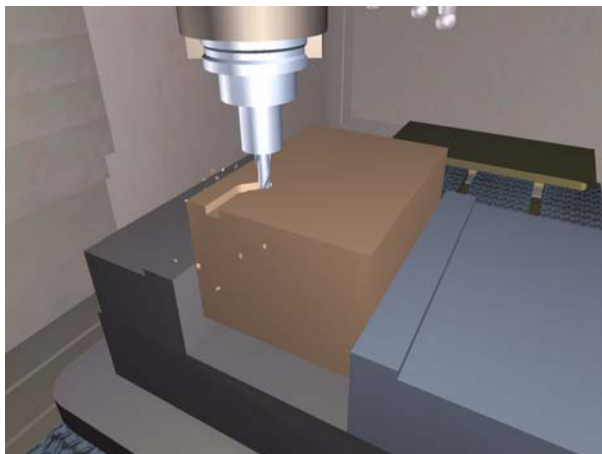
Snapshot of machining of a work-piece showing the flying chips
